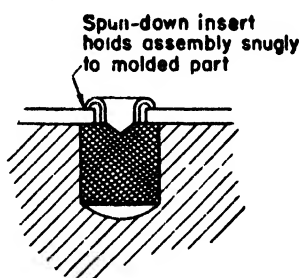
Insert for assembling a mating part snugly to a molded part.
